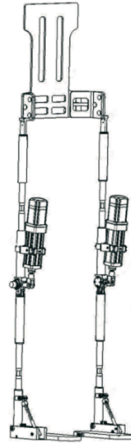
Schematic diagram of the overall assembly of the lower limb exoskeleton robot
